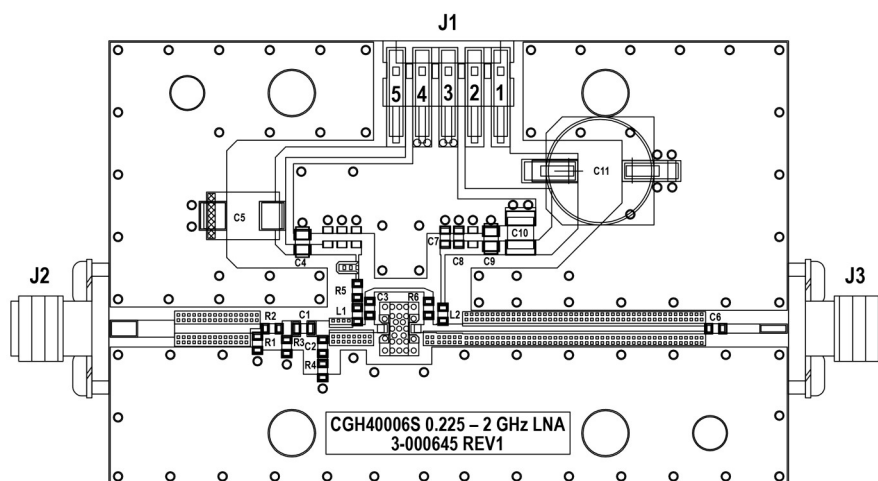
CGH40006S-LNA-KIT Demonstrator Printed Circuit Board Assembly
